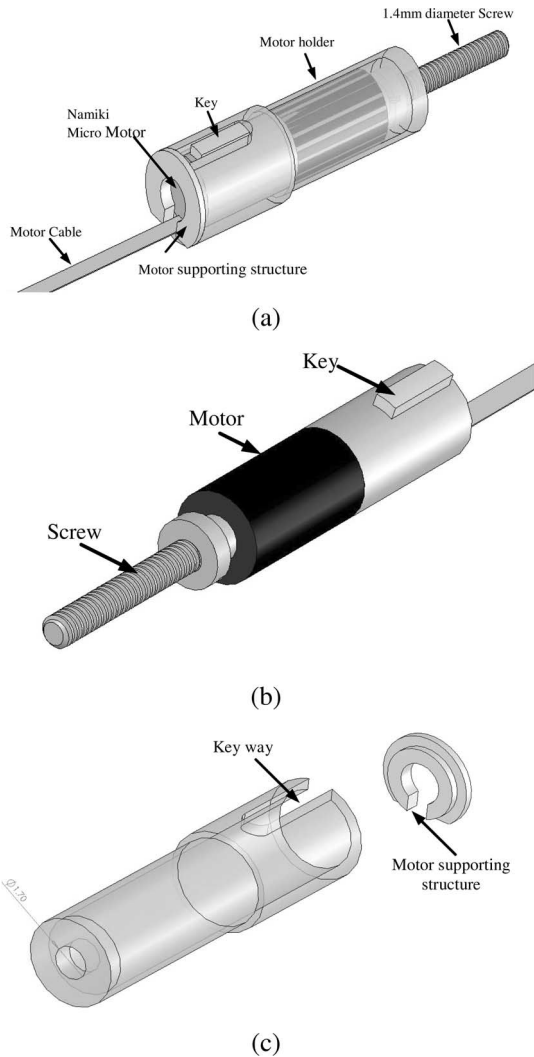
Linear actuator stage of the second-generation design prototype. (a) CAD drawing of the linear actuation stage. (b) Motor and screw assembly. (c) Motor holder and supporting structure.
